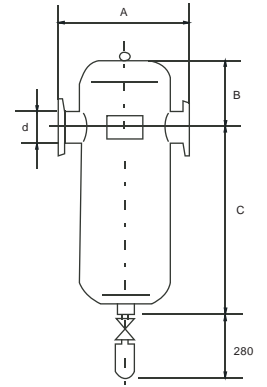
Carbon Steel Casting External Type Auto Drain Valve.
